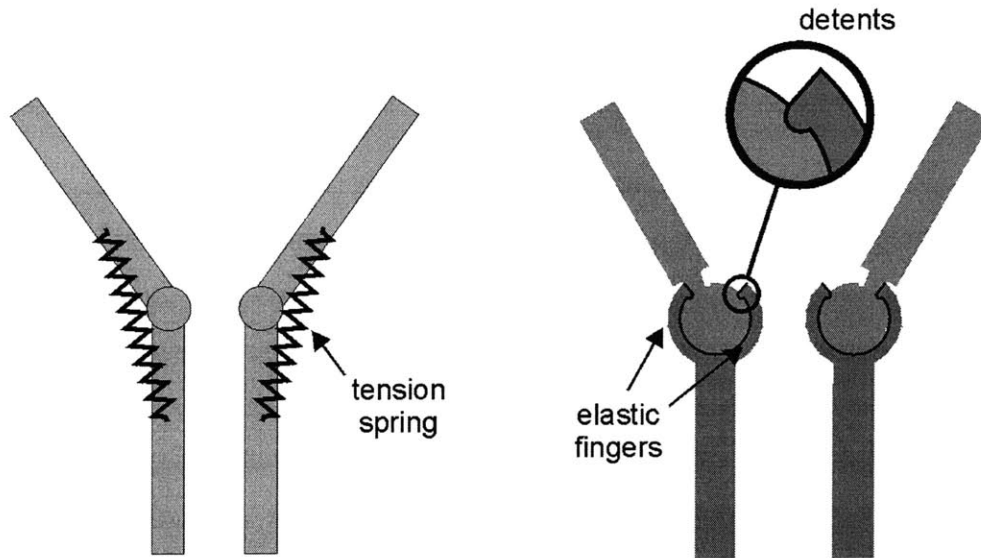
Bistable rotary joint designs: (a) spring-loaded over-throw mechanism; (b) detent-based latching mechanism.
